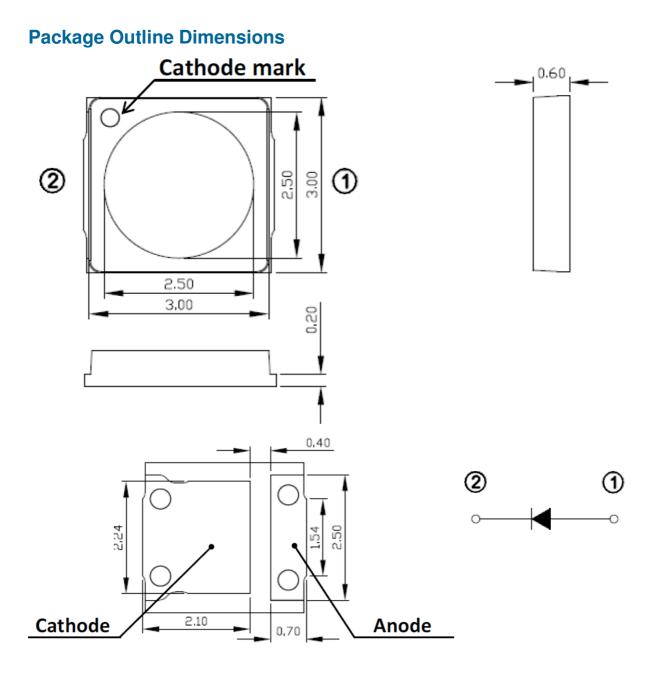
Mechanical drawings of the 3030 package (unit is in mm with ±0.1mm tolerance)
